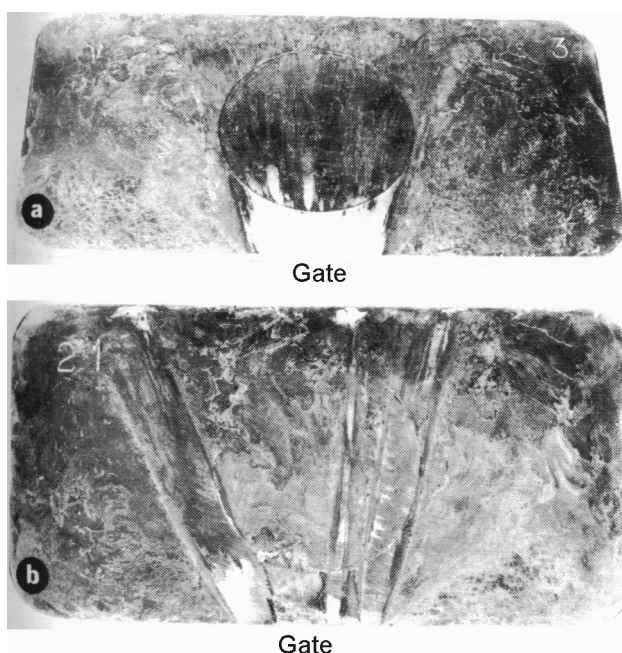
Flow Lines on Flat Plate Castings Showing Difference Between Casting Filled by Full Width of Fan Gate (a) and Casting Filled by Partially Blocked Gate (b). [5]
